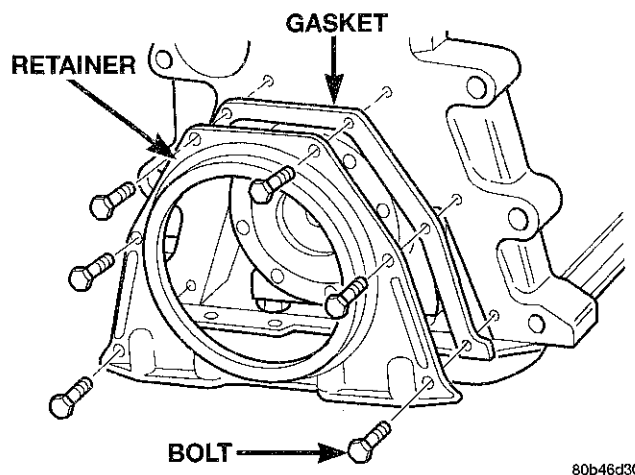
Crankshaft Rear Seal Housing and Gasket
